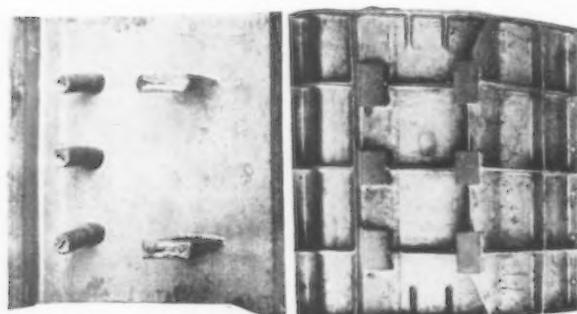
The Finished Casting at the Left Shows the Heads and Gates. At the right is the other side of the casting after machining and ready for assembling
